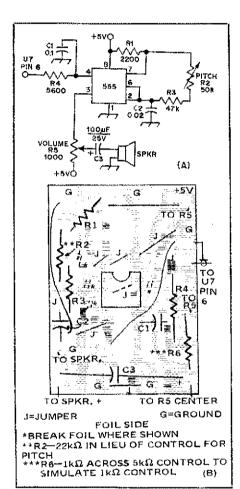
At A is shown the schematic diagram of the NE555 sidetone oscillator. At B is shown the modified Radio Shack printed circuit board used to mount the NE555 IC and its associated parts. The user of this hint should have the parts on hand and drill the mounting holes for the placement of those particular parts.
